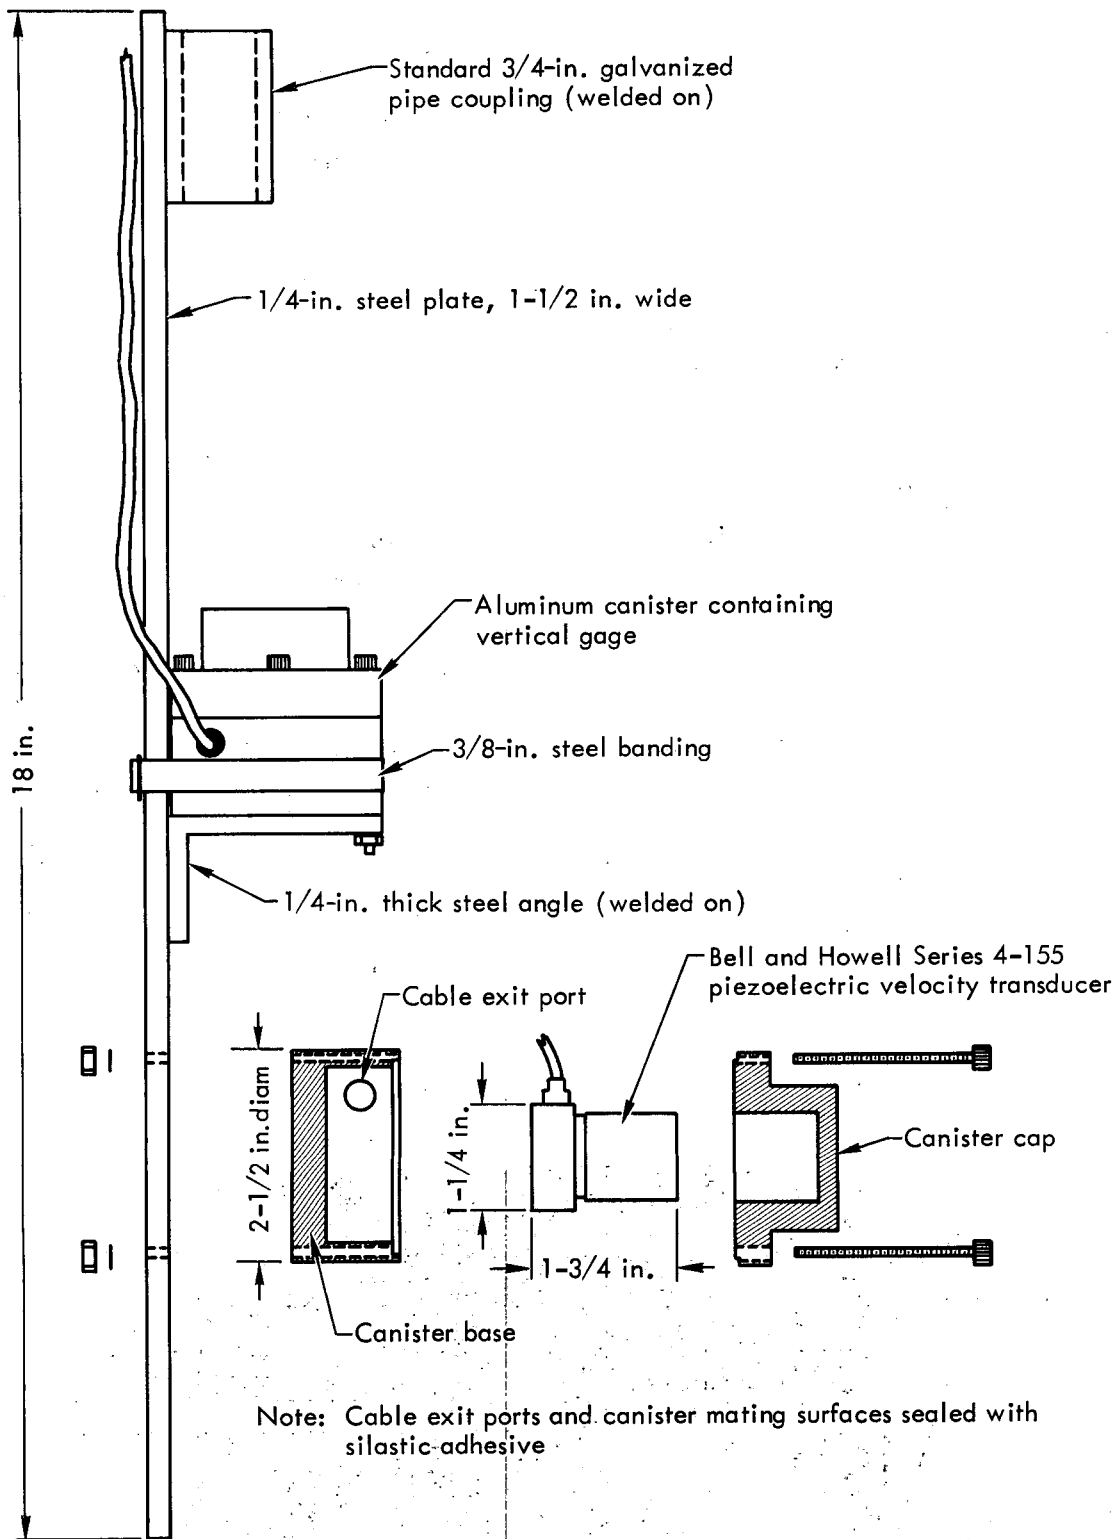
Typical mounting bracket indicating gage and canister placement.
